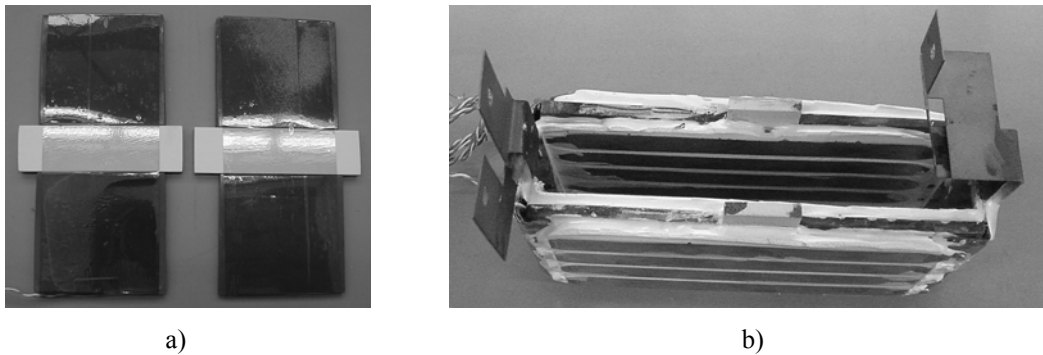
a) separately moulded leakage layer plates connected to ceramic elements, b) complete winding structure with inserted leakage layer and heat pipes attached
